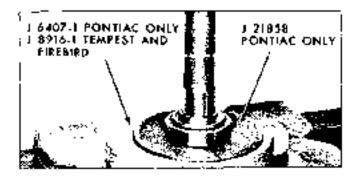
A-10 Kemoving Axle Shott Bearing (Typical
